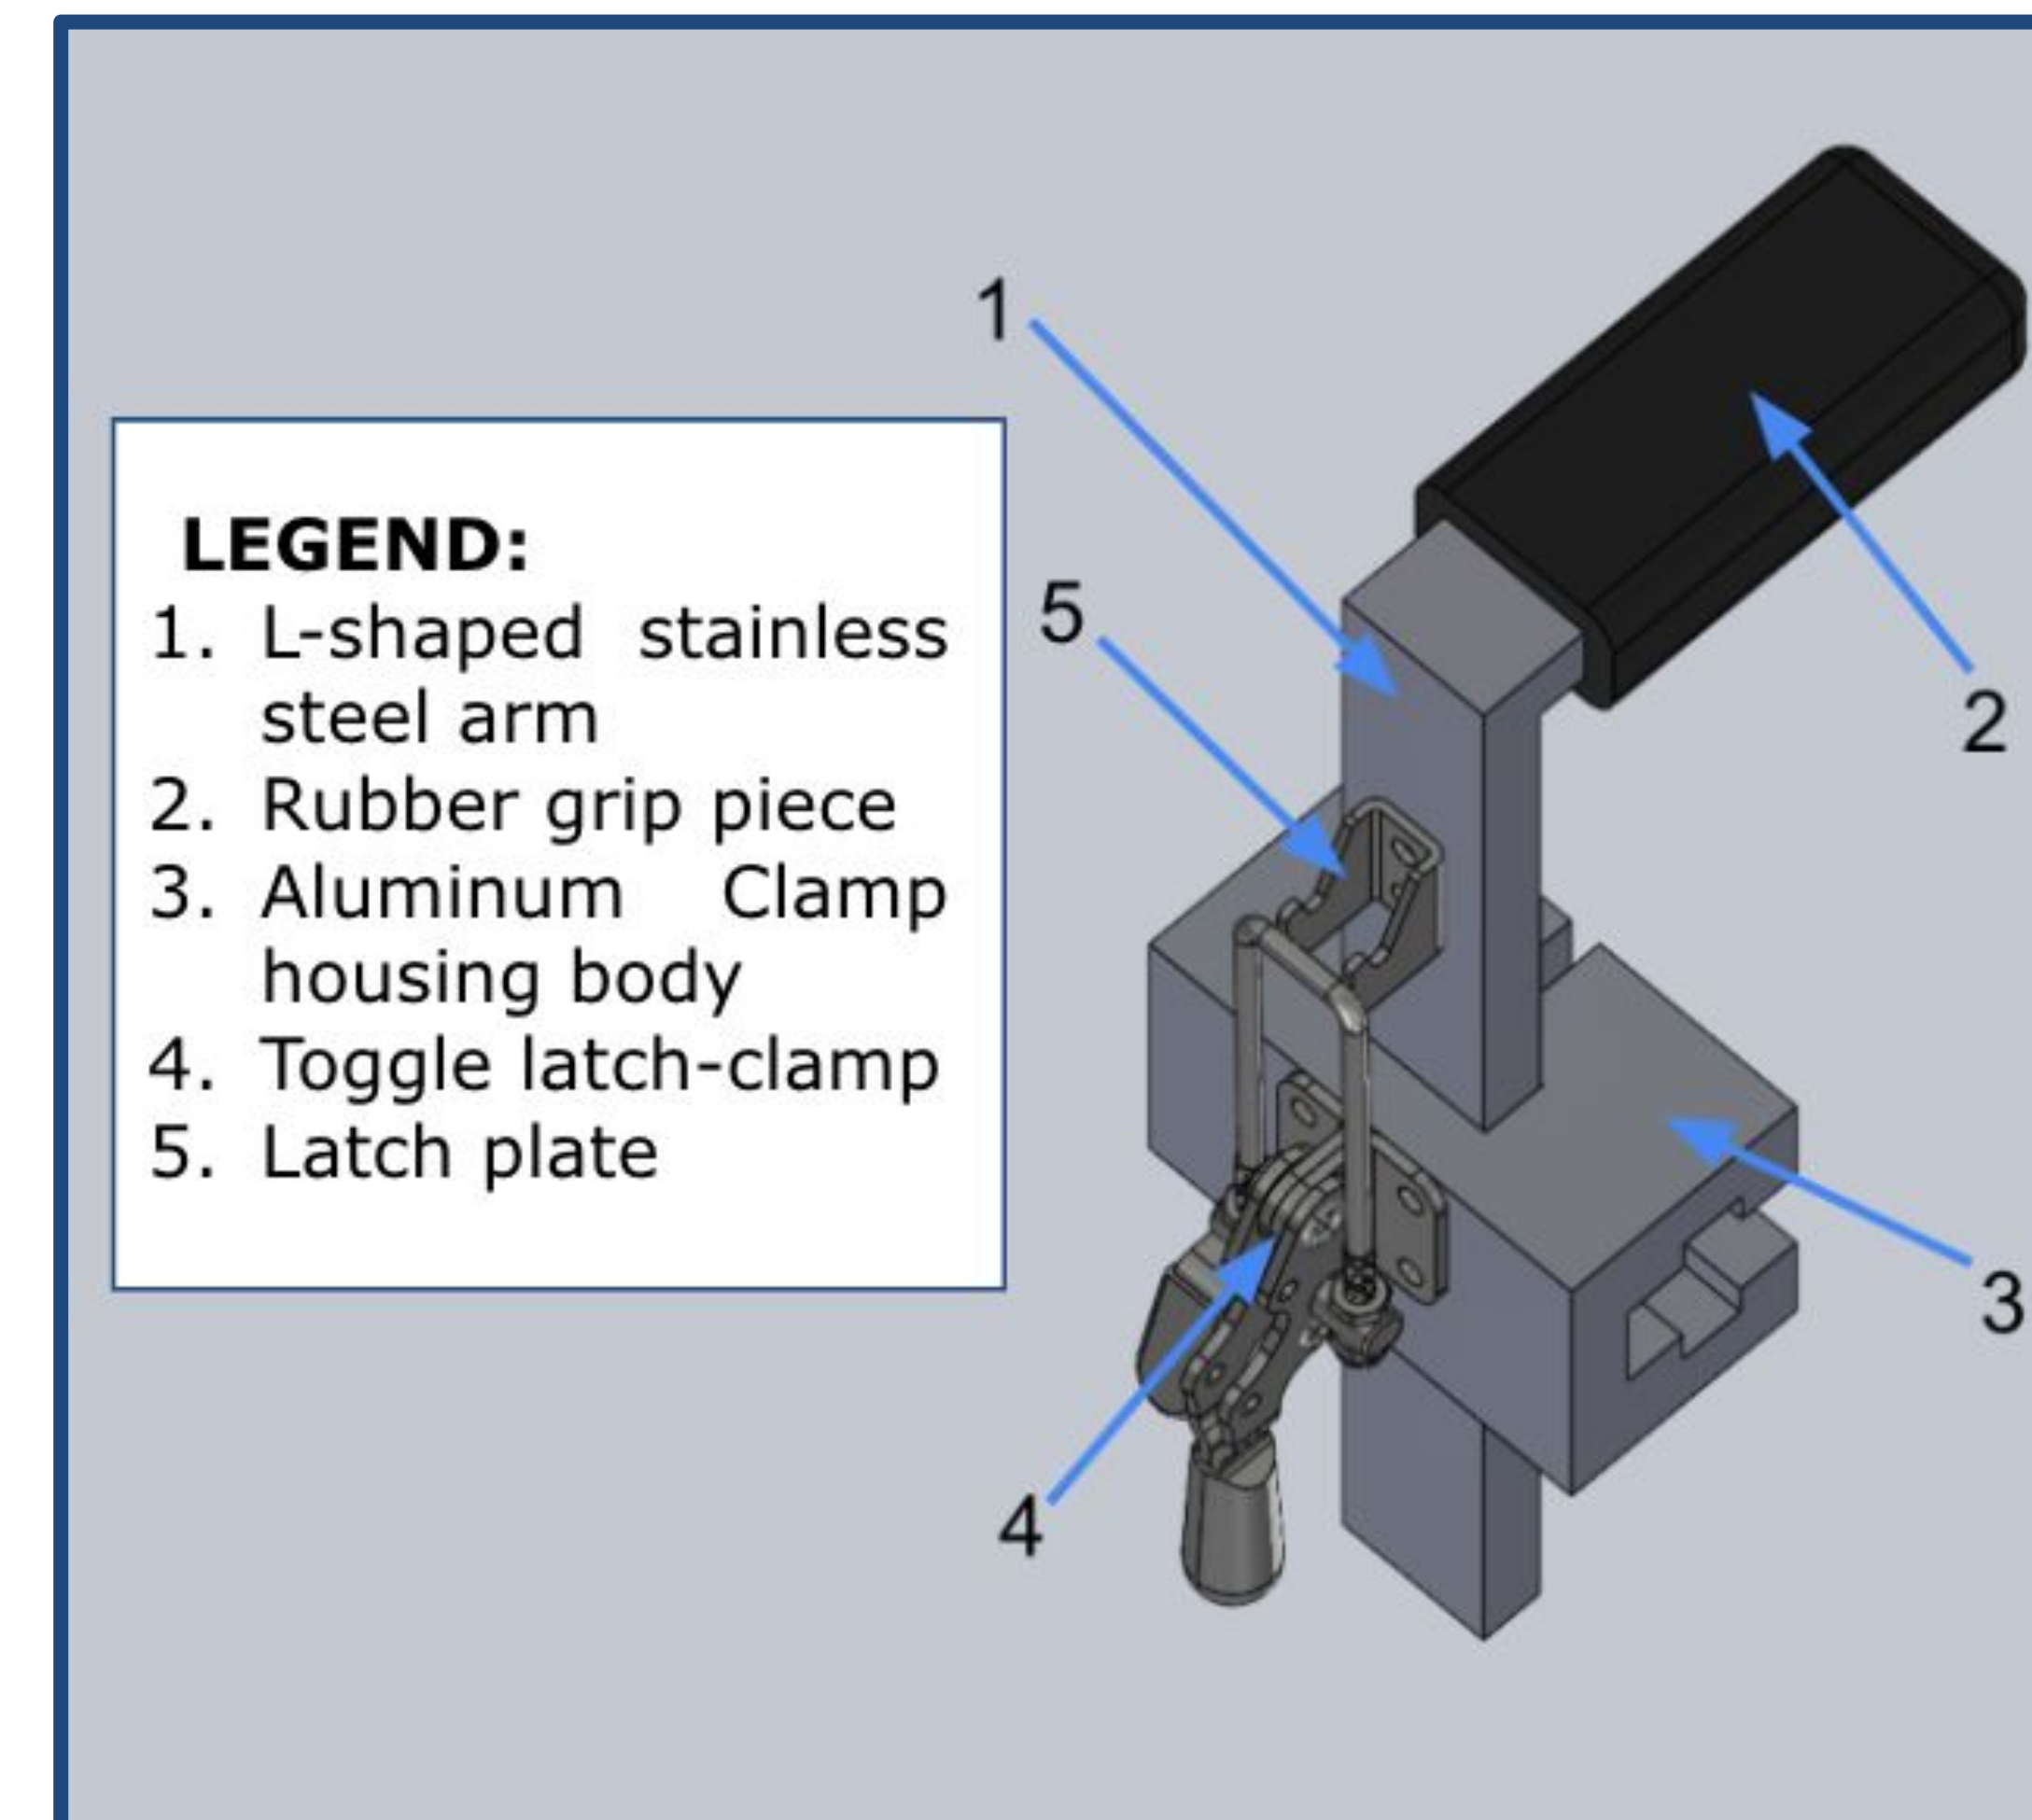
A full assembly of the clamp, including the steel arm, grip piece, housing body, latch clamp and latch plate.
